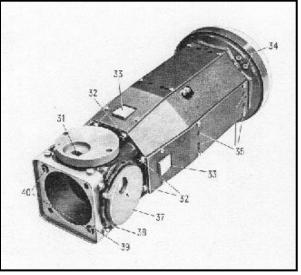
D500 tube stand showing the open shutter indicator as # 32.
